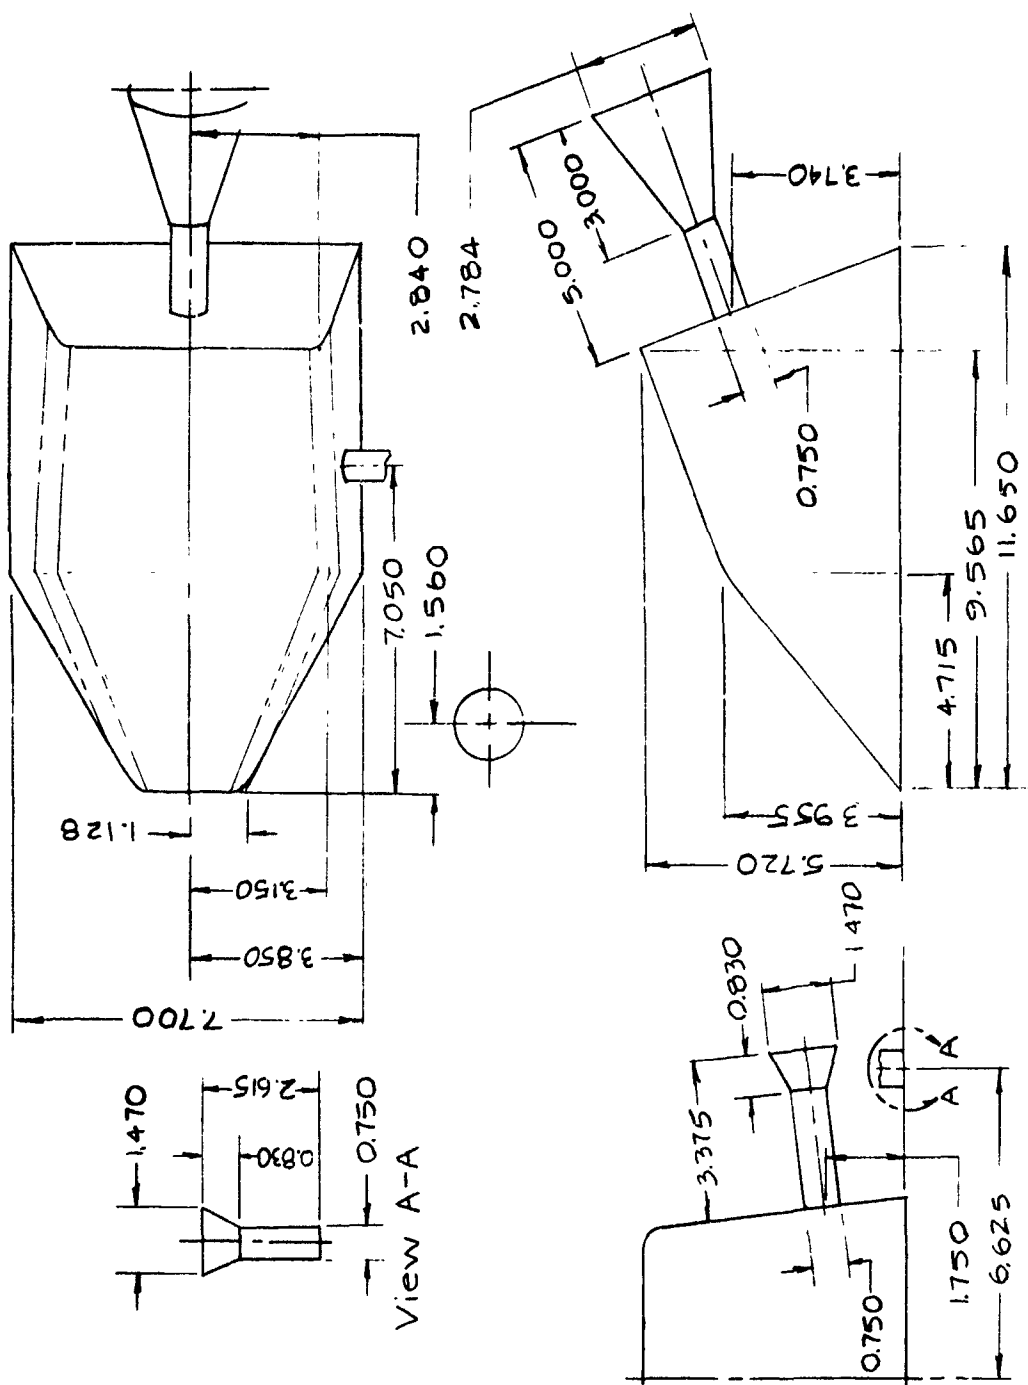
Thrustor Assembly Model Basic Dimensions
